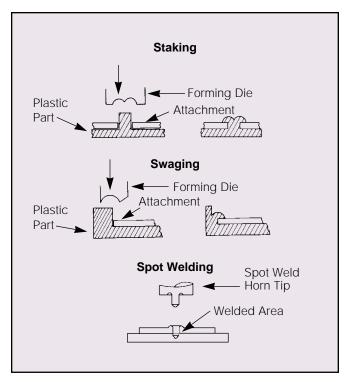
Ultrasonic Staking, Swaging and Spot Welding
